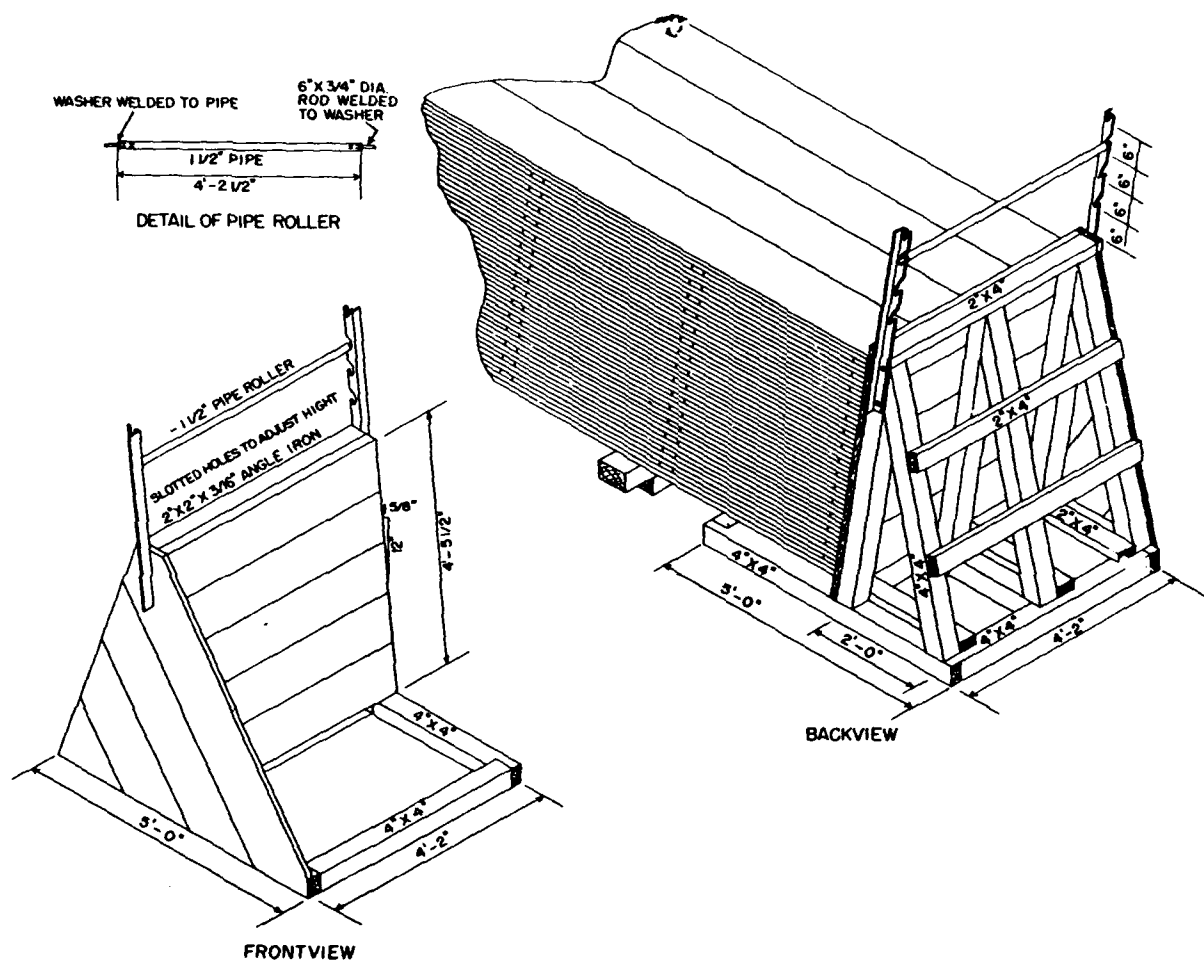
Diagram of butt boards used to control pitch on draft face.
